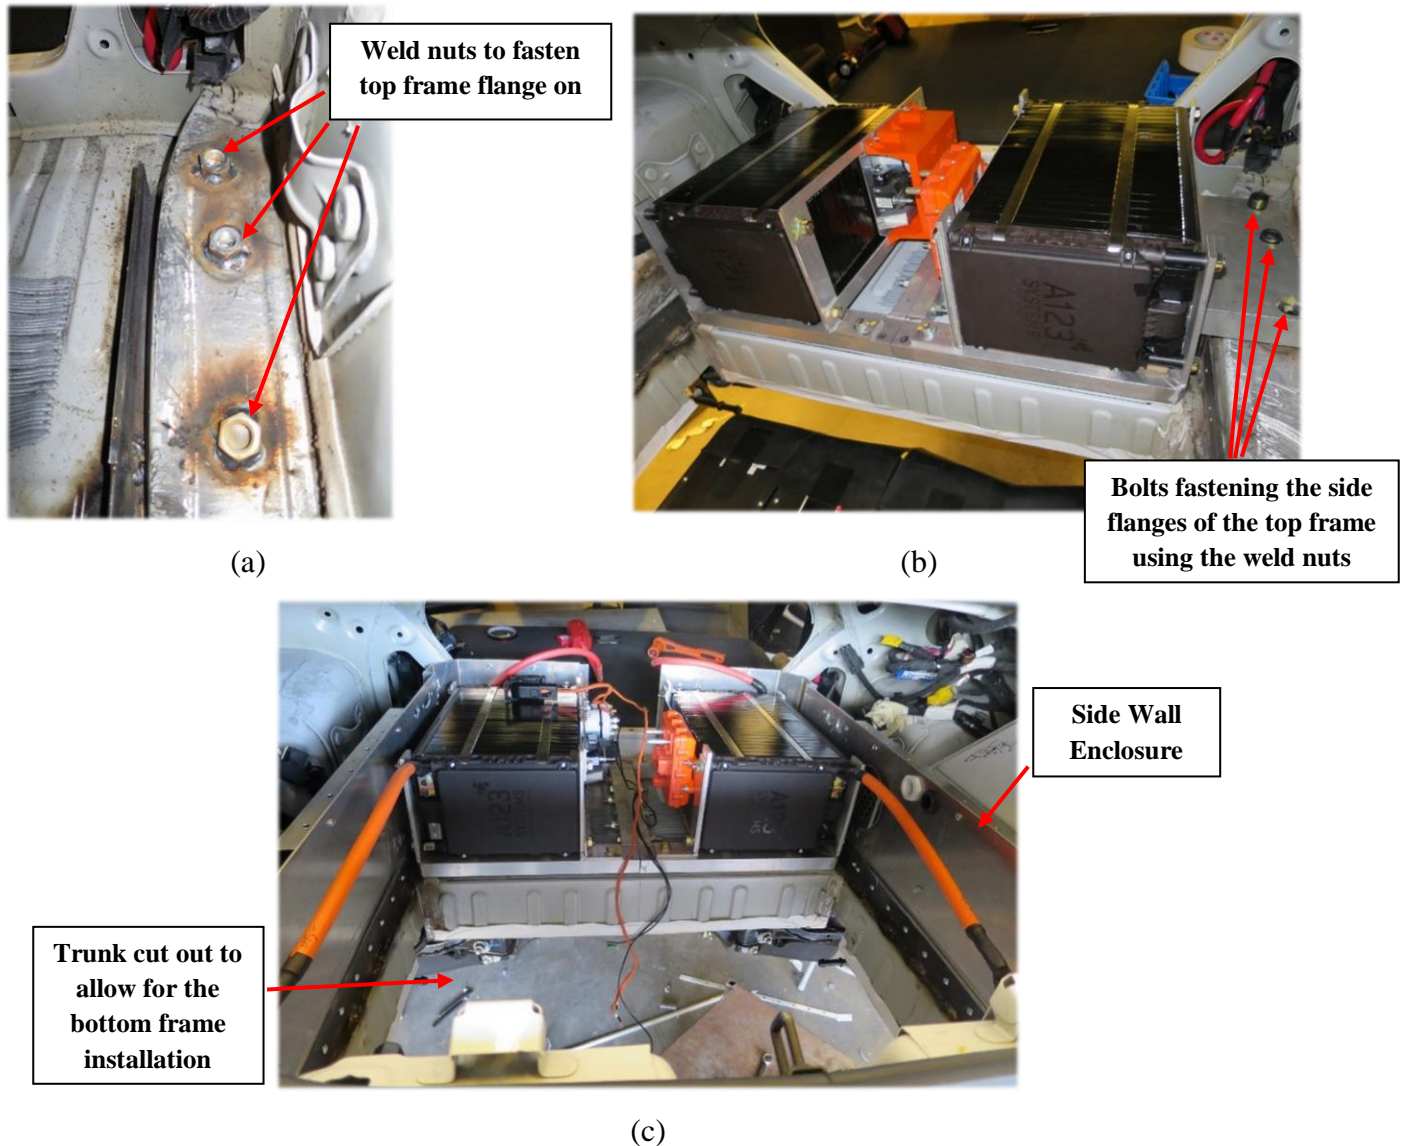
Top Frame Integration – (a) weld nuts, (b) integration, (c) wire and side enclosure integration
